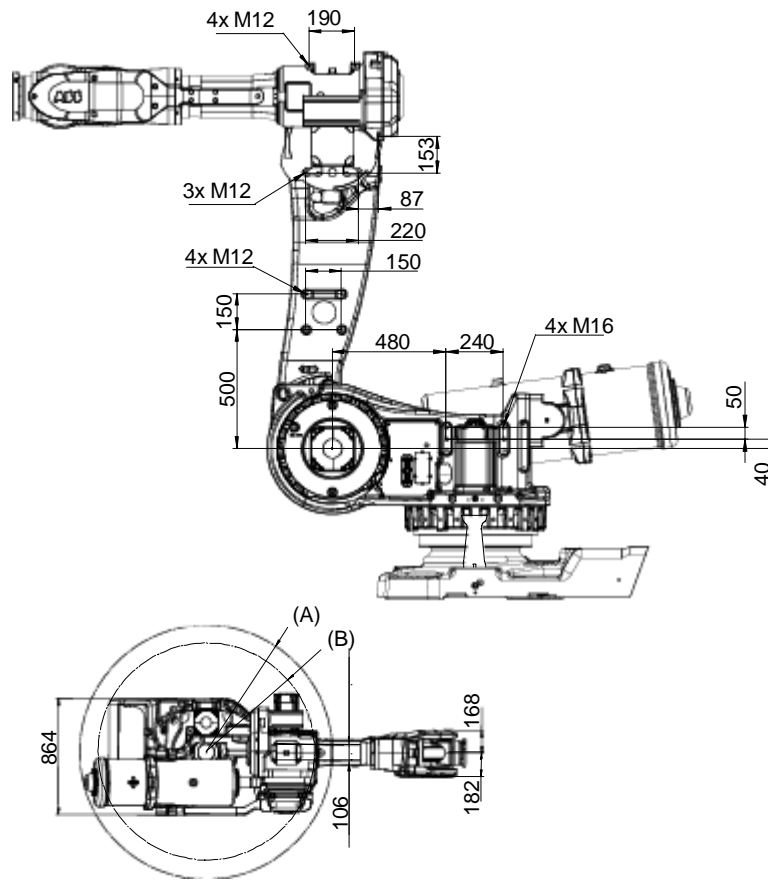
Holes for mounting extra load on upper arm on IRB 6650S (dimensions in mm).
